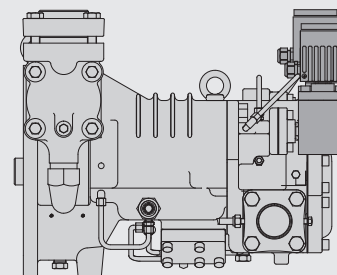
OS.(A)74 with explosion-proof solenoid coils
